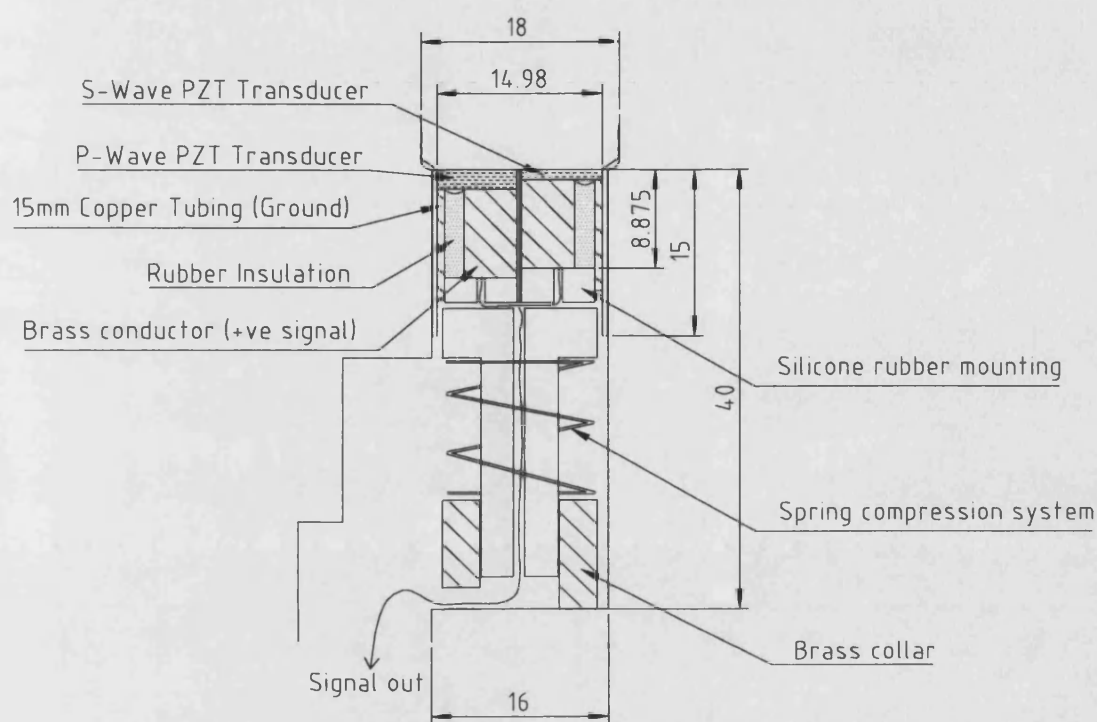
Detail of the transducer assembly housed inside each endcap for velocity measurement at elevated hydrostatic pressures. Dimensions in mm.
